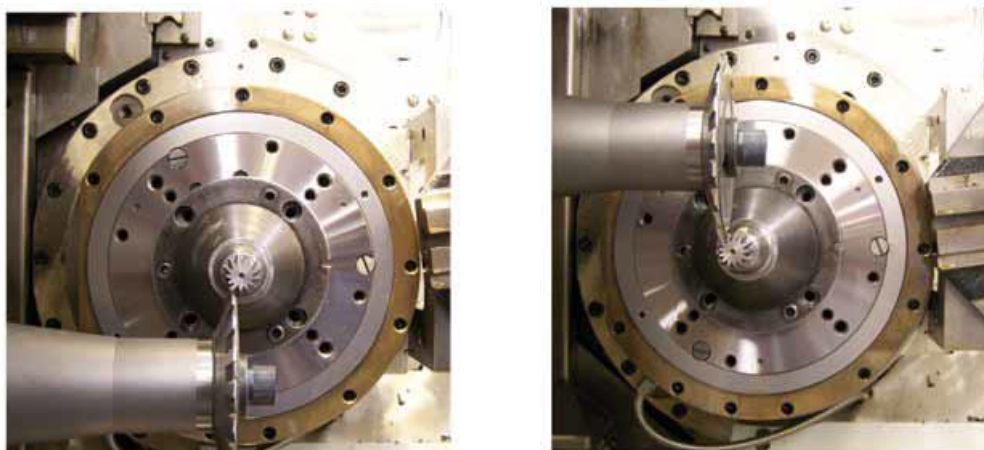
Straight bevel gear cutting with disc cutter (top: lower flank, bottom:upper flank)
